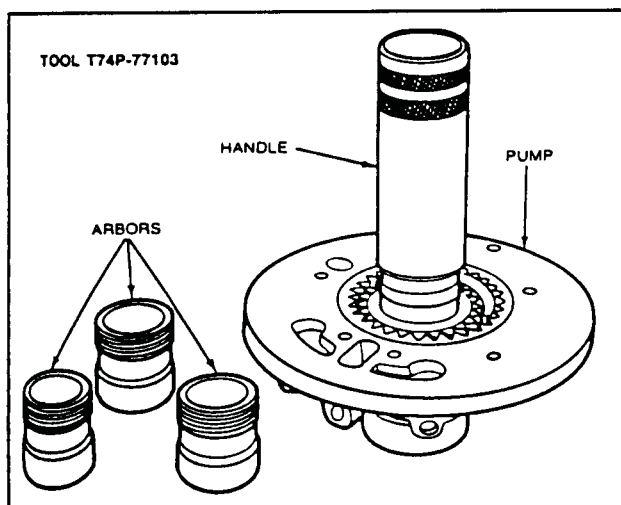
Pump Alignment Tool T74P-77103-X Set
